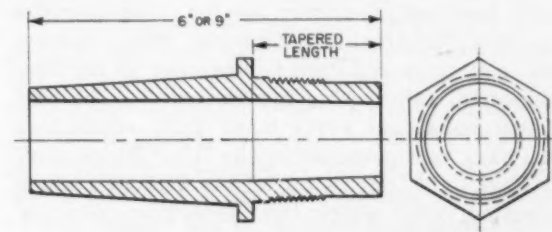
Sketch of a rod die having a single taper at the top. Compound tapers are frequently used in both top and bottom sections, depending on alloy being cast.
